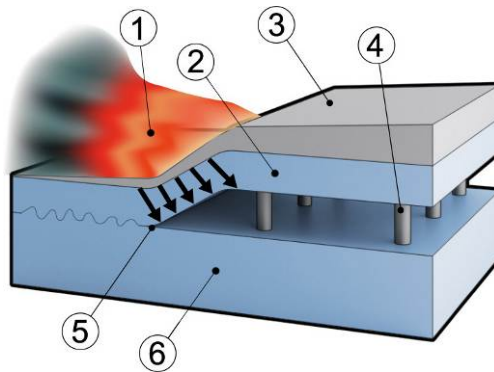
Explosive welding scheme: 1 - Detonation products, 2 - coating for base material, 3 - explosive, 4 - spacers, 5 - connection point, 6 - base material (Manufacturing Guide, 2020)
